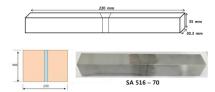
Dimensions of the welded specimen with base materials of SA 516.
